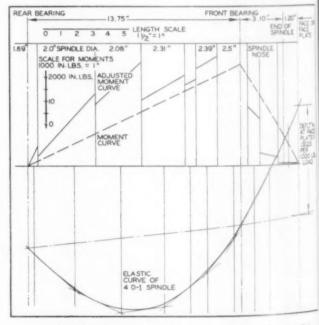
Deflection diagram for 4 in. D1 Spindle, with two radial bearings.
